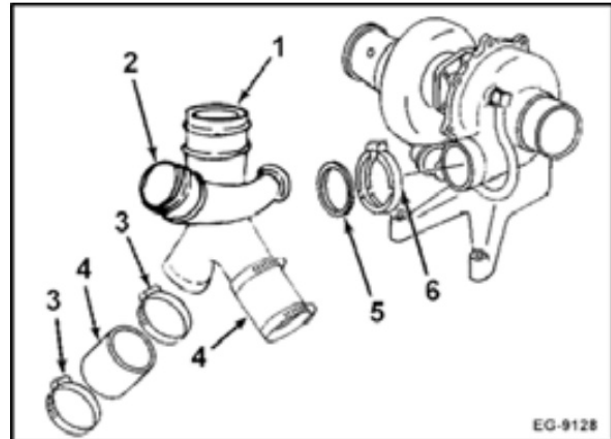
Removing Charge Air Cooling Tube/Crossover Pipe Assembly
